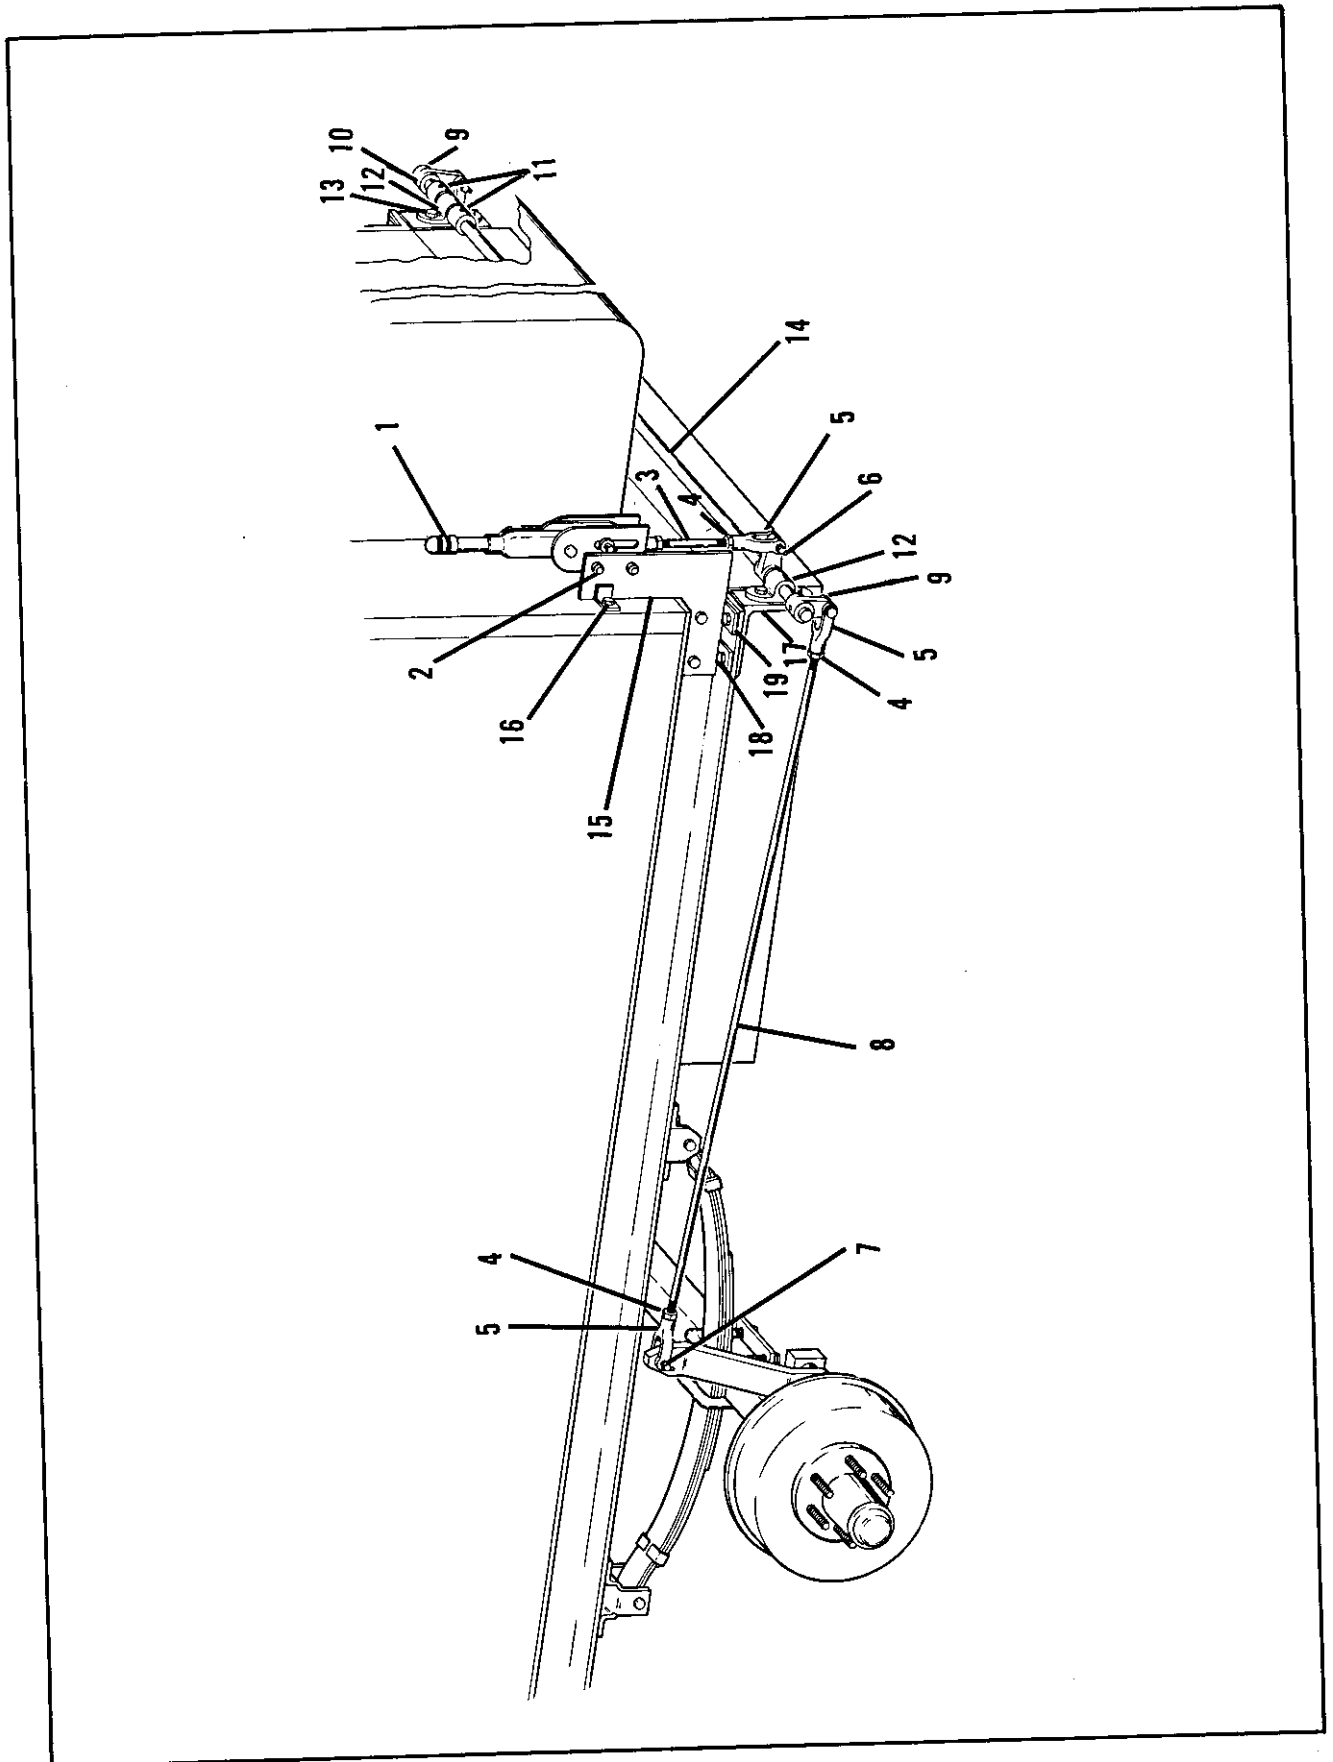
Handbrake Lever and Cross Shaft Assy
